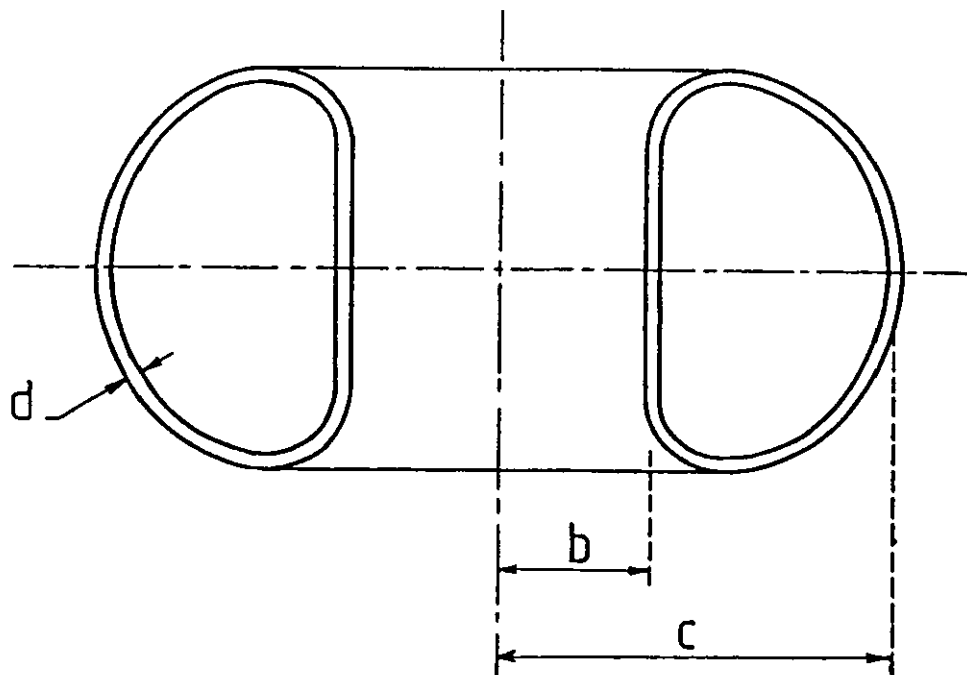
Single-layer toroidal winding with D-shape cross-section.
